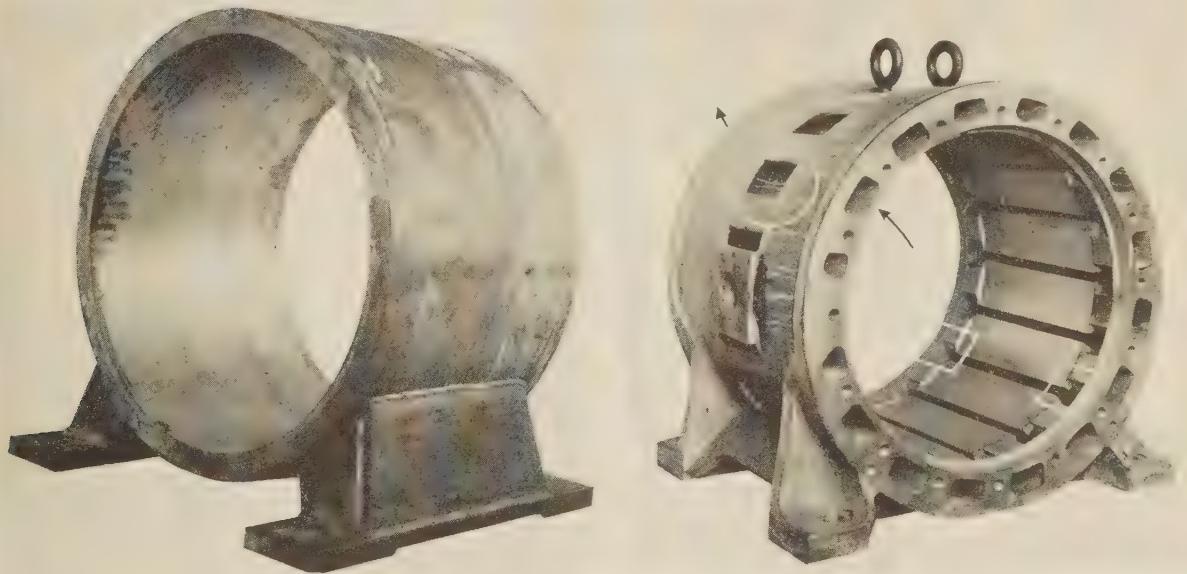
WELDED AND CAST MOTOR FRAMES
